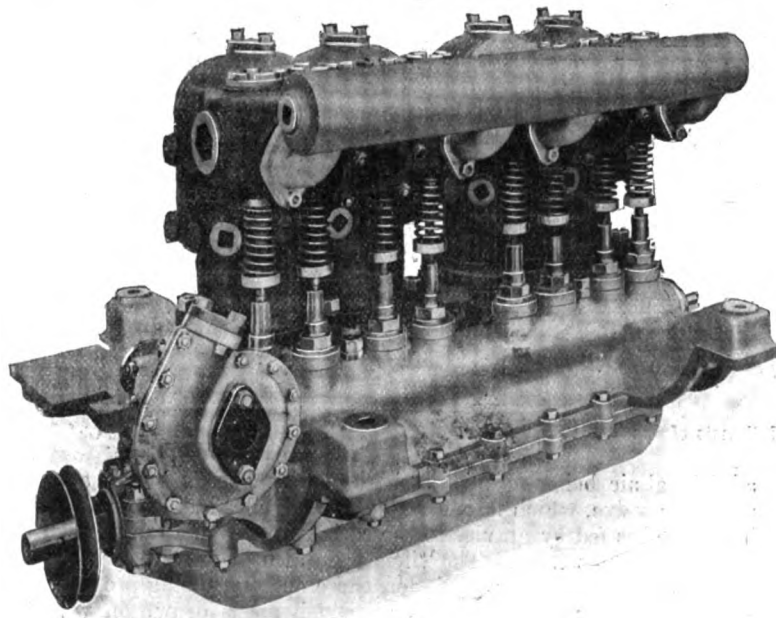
General View of Valve Side of Speedwell 25-h.p. Engine.
